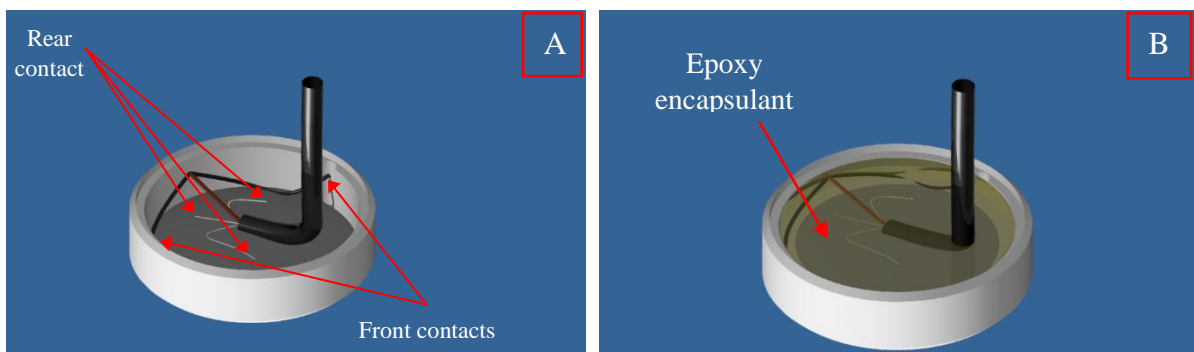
A) The contacts soldered to the coaxial cable. B) The contacts encapsulated with epoxy.
